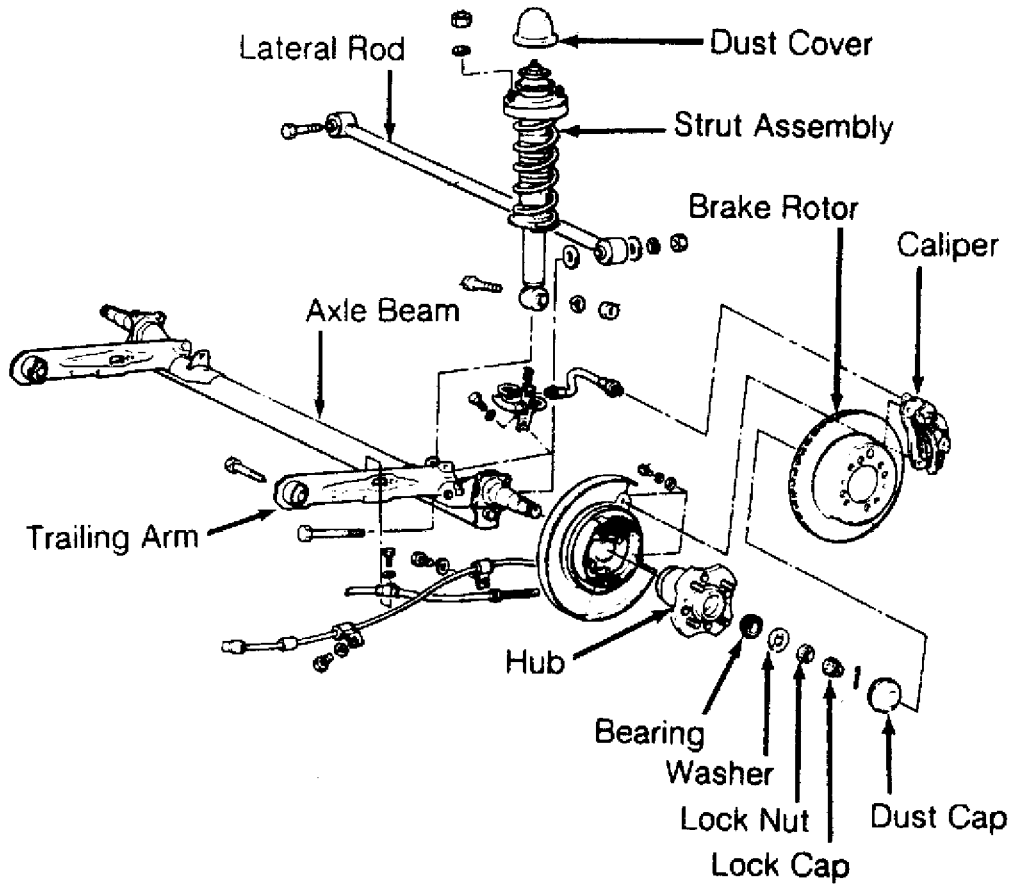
Exploded View Of Rear Suspension (Eclipse FWD Shown; Colt, Colt 200, Galant FWD, Mirage & Summit Are Similar)
